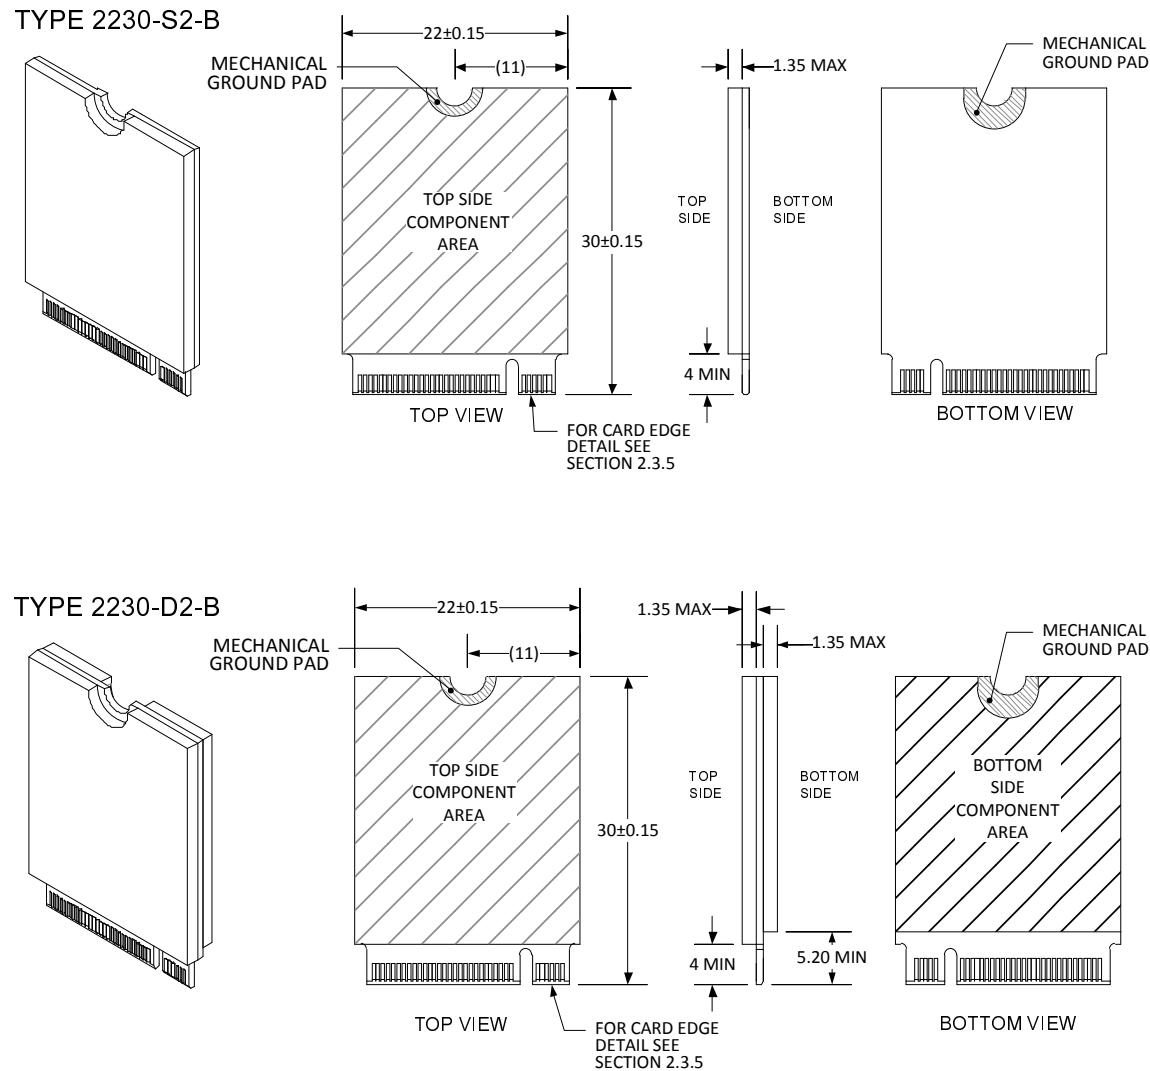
M.2 Type 2230 Mechanical Outline Diagram Examples
